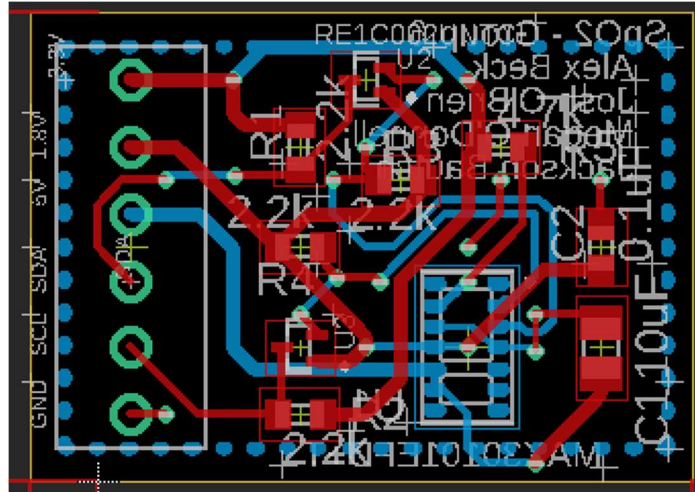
Board layout with dimensions 17.77mm x 25.07mm
